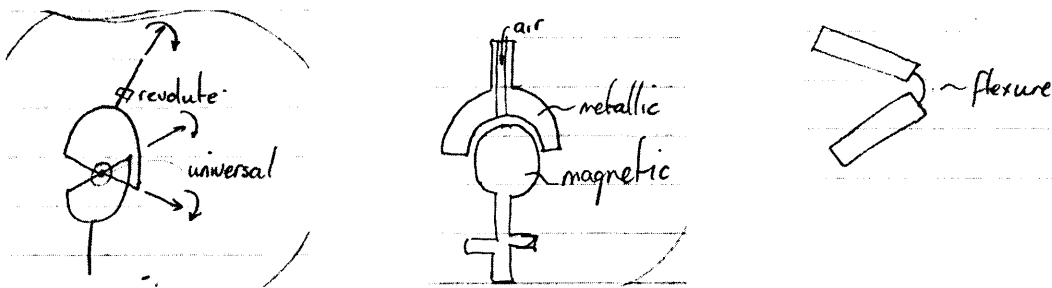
Modified universal joint Figure 2.2 Magnetic air bearing Figure 2.3 Flexure joint
